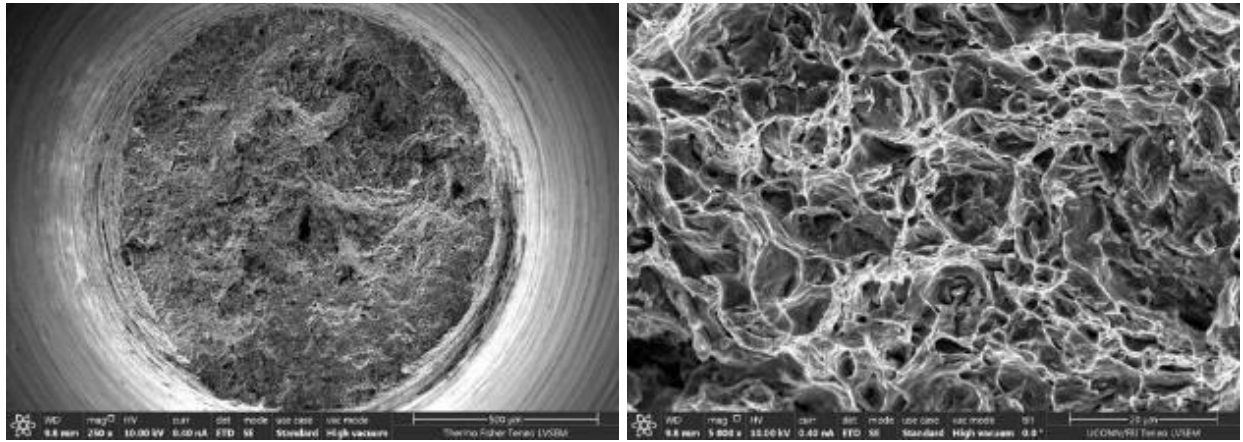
(a) Fracture surface of HT-Baseline specimen; (b) The magnified view of fracture surface. Dimpled morphology support the ductile fracture of HT-Baseline specimen.
